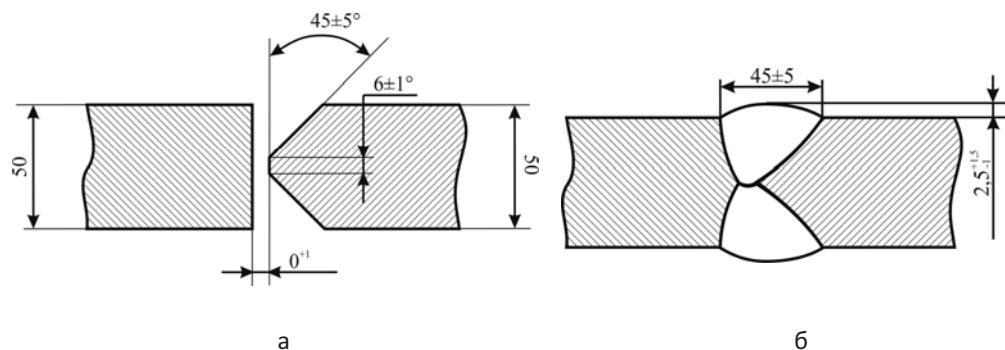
Type of test samples edges cutting ($t = 50\text{mm}$)
